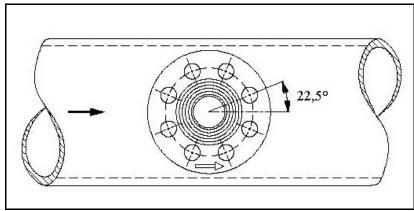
Mounting a 8-bolt-hole flanged mounting stud
